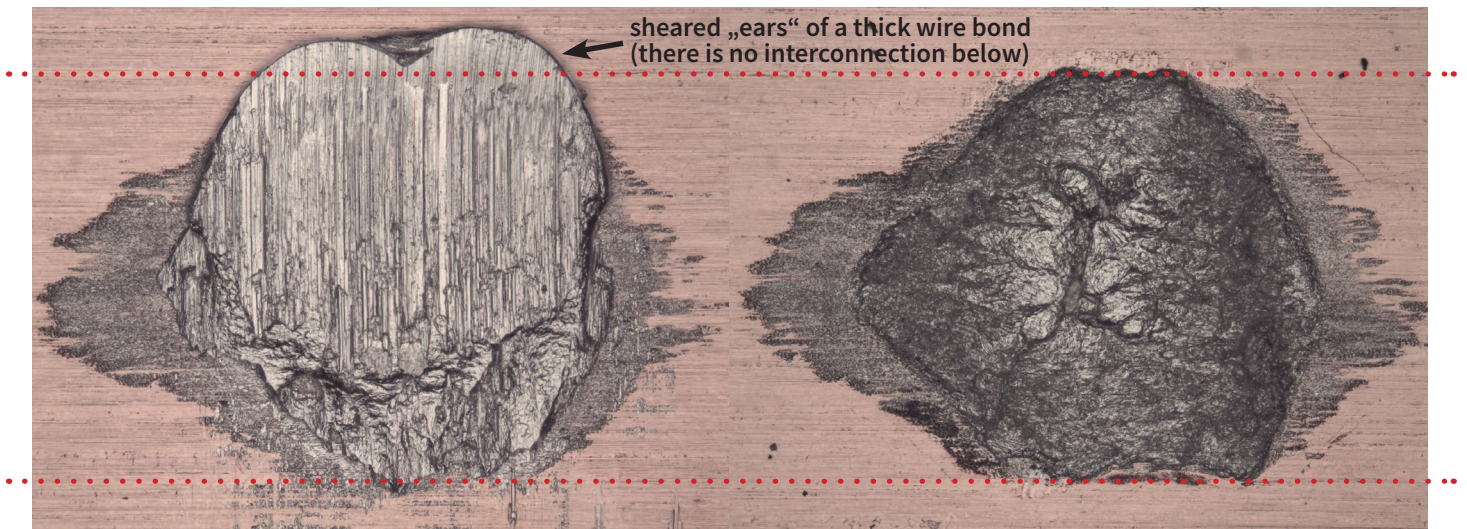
Comparison of shear area width – shear fracture pattern (left), BAMFIT fracture pattern (right)
